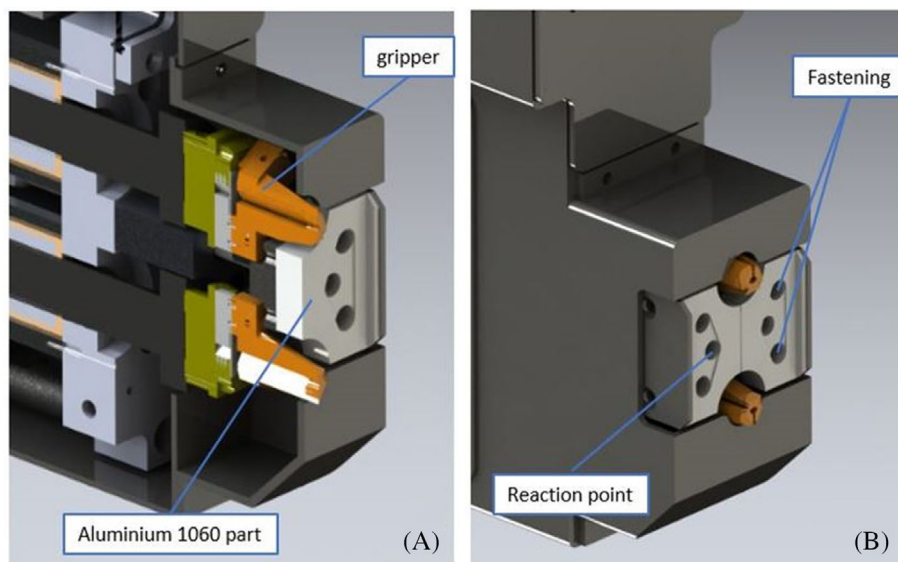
Positioning of parts on the robot tool: (A) section of tool with gripper systems; (B) reaction components, area of fastening to the tool, and area behind which the grippers find a reaction
